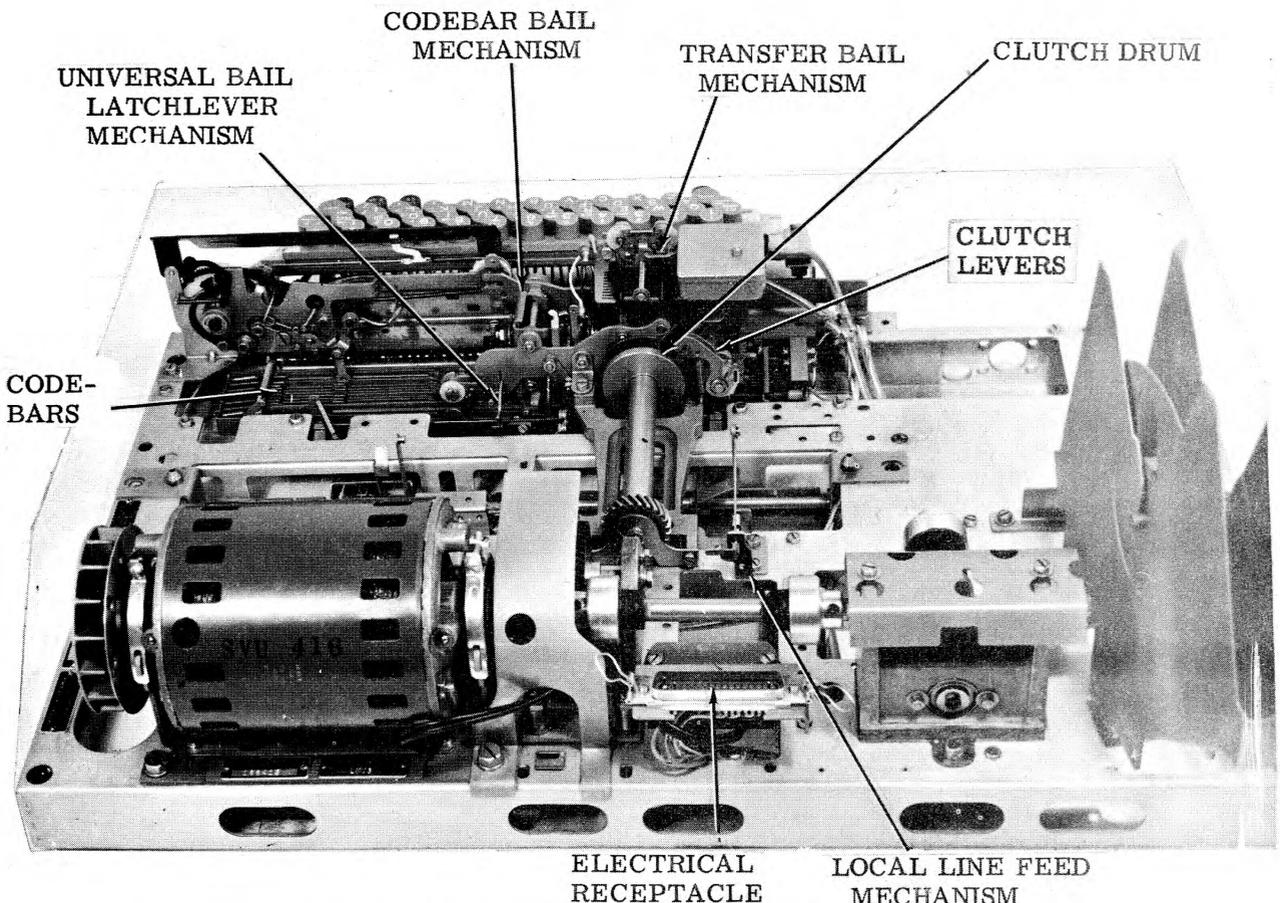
Typical 35 Keyboard for Automatic Send-Receive Sets (Rear View)
